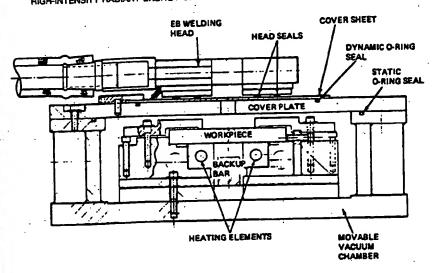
Schematic of a sliding-seal electron-beam (SSEB) welding system. (From "Sliding-Seal Electron-Beam Slot Welding of an Aircraft Wing Closure Beam," by R. W. Messler, Jr., Welding Journal, 60(9), published in 1981 by and used with permission of the American Welding Society, Miami, FL.)
